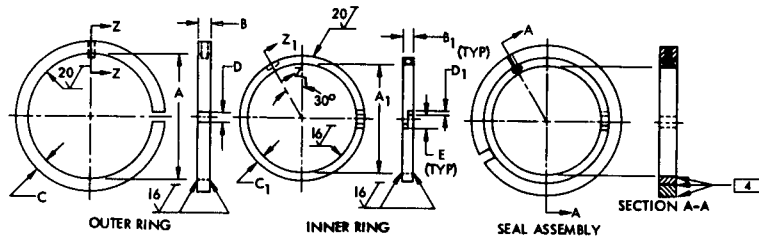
SECOND-STAGE ROD SEAL ASSEMBLY, 2.54 CM (1.0 IN.) CHEVRON
